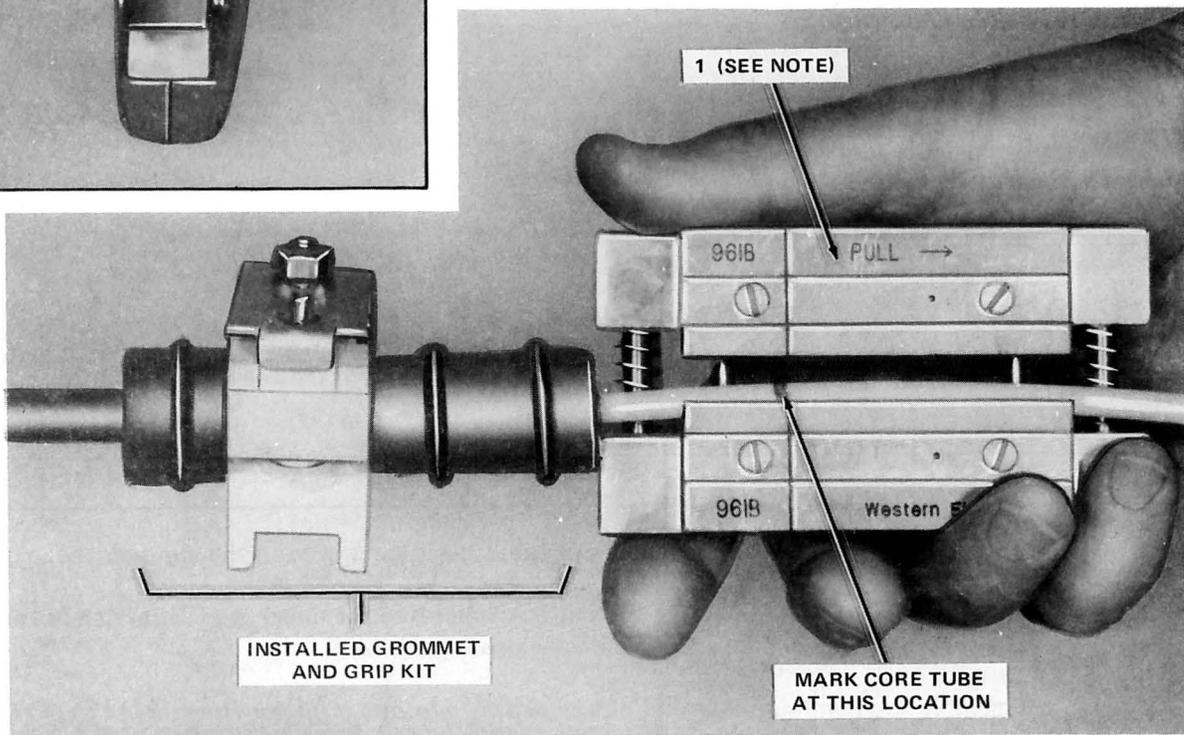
Marking and Slitting Core Unit (Crossply Sheath Cable)
